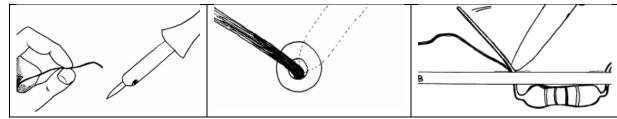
Basic steps of soldering @ MightyOhm, http://mightyohm.com/blog/2011/04/soldering-is-easy-comic-book/
